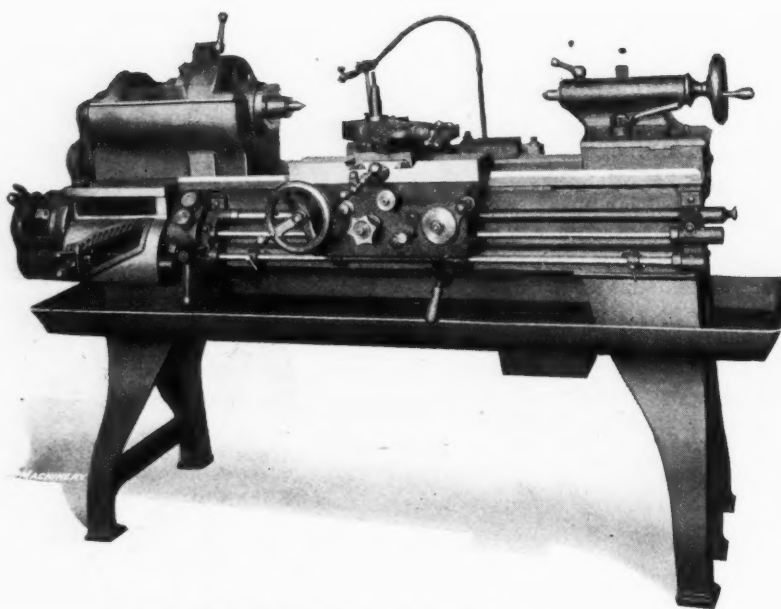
Davis "Close-coupled" Tool-room Lathe
